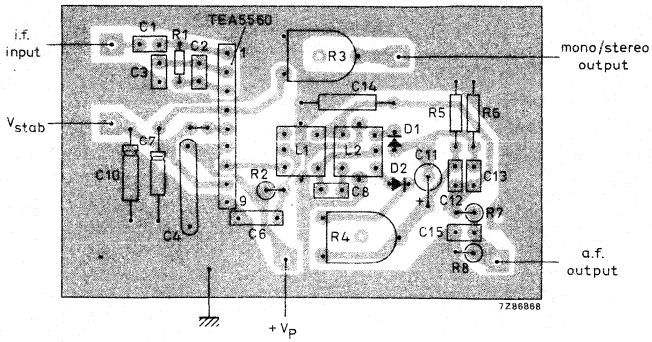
Printed-circuit board component side, showing component layout. For circuit diagram see Fig. 2.
